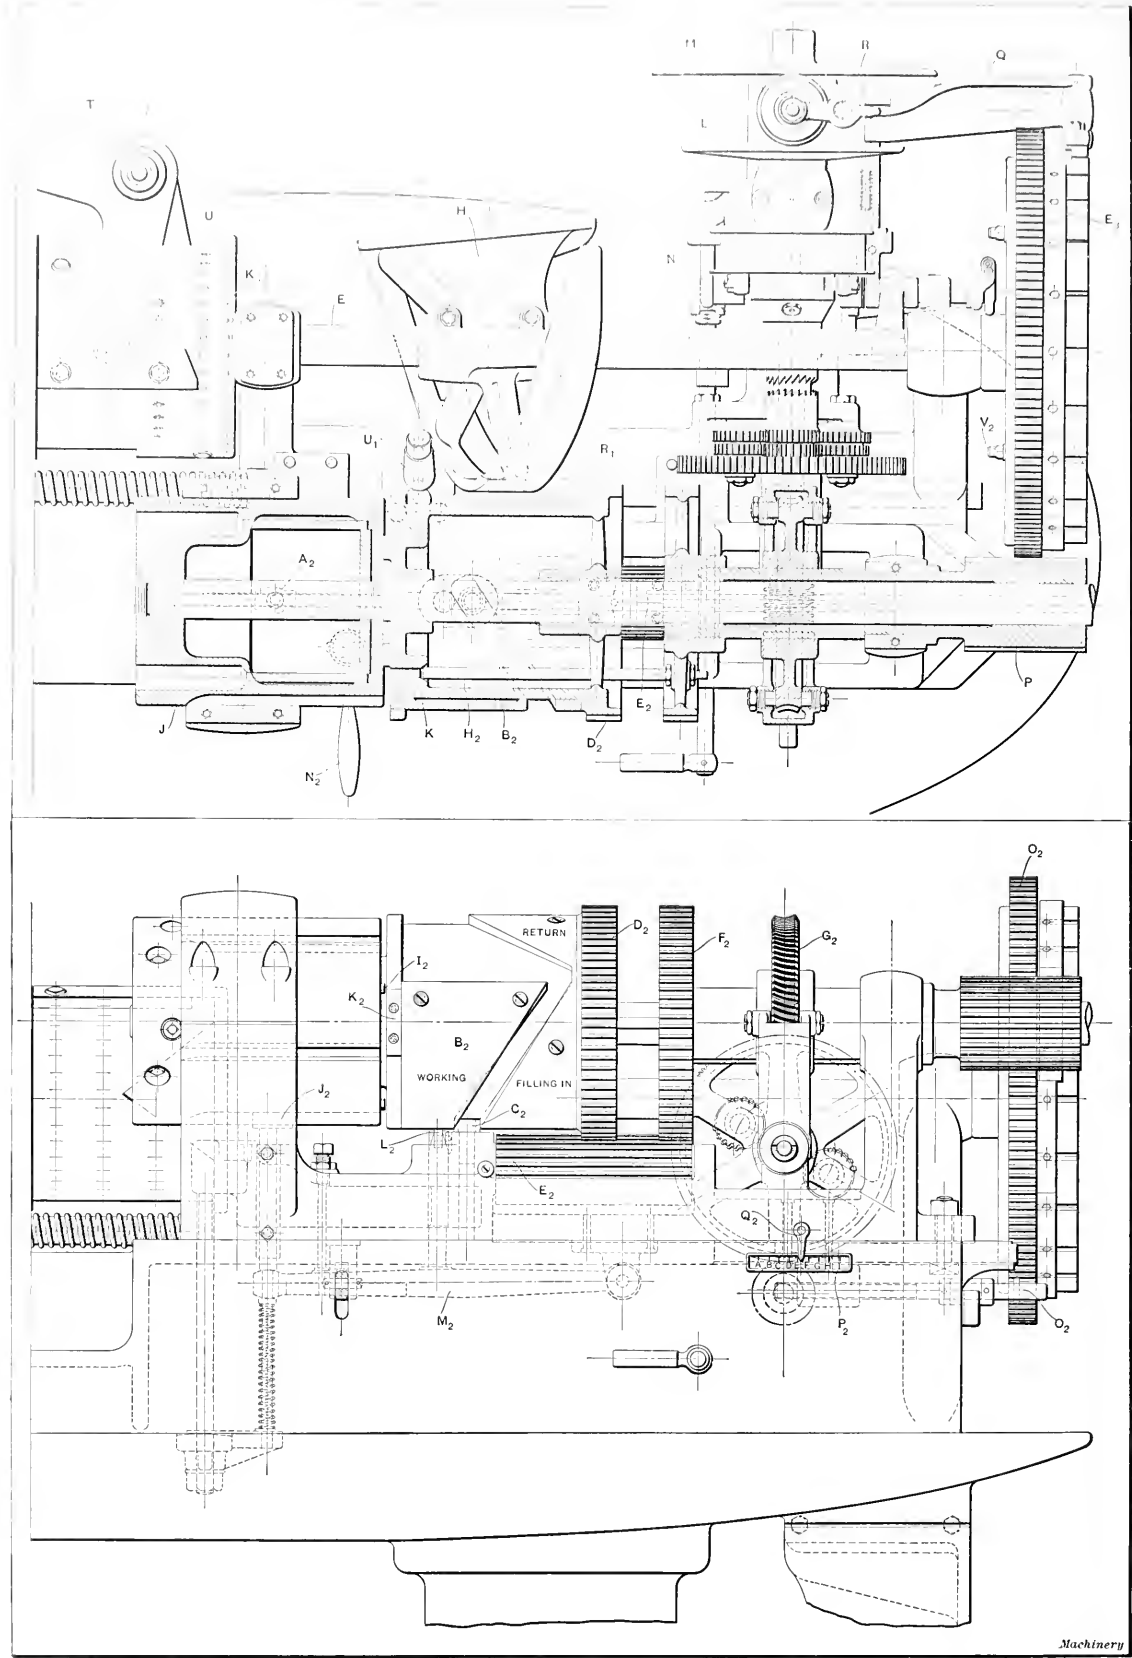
Sectional Plan View of Turret End of Cleveland Automatic, showing Construction of Turret, Regulating Drum and Auxiliary Mechanism. Fig. 14. Front Elevation of Turret End of Cleveland Automatic
